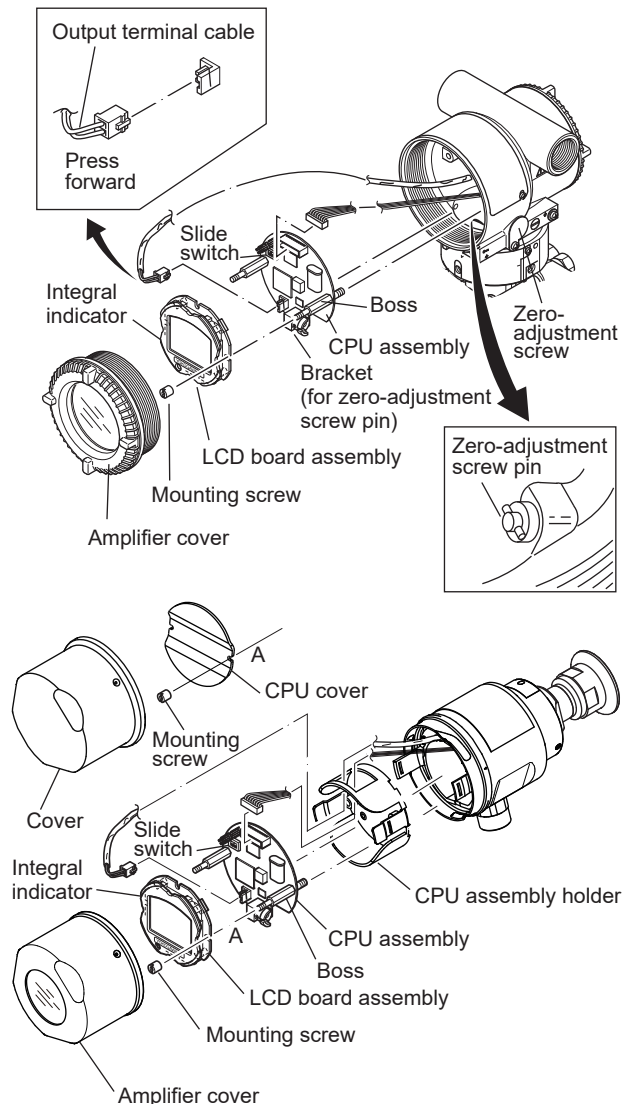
Removing and Attaching LCD Board Assembly and CPU Assembly
